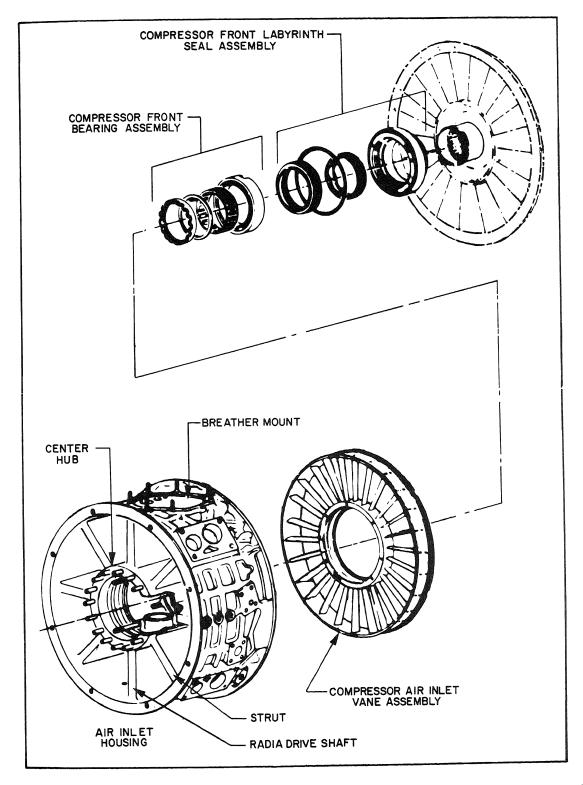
Air inlet housing, inlet guide vanes, and compressor front frame.
